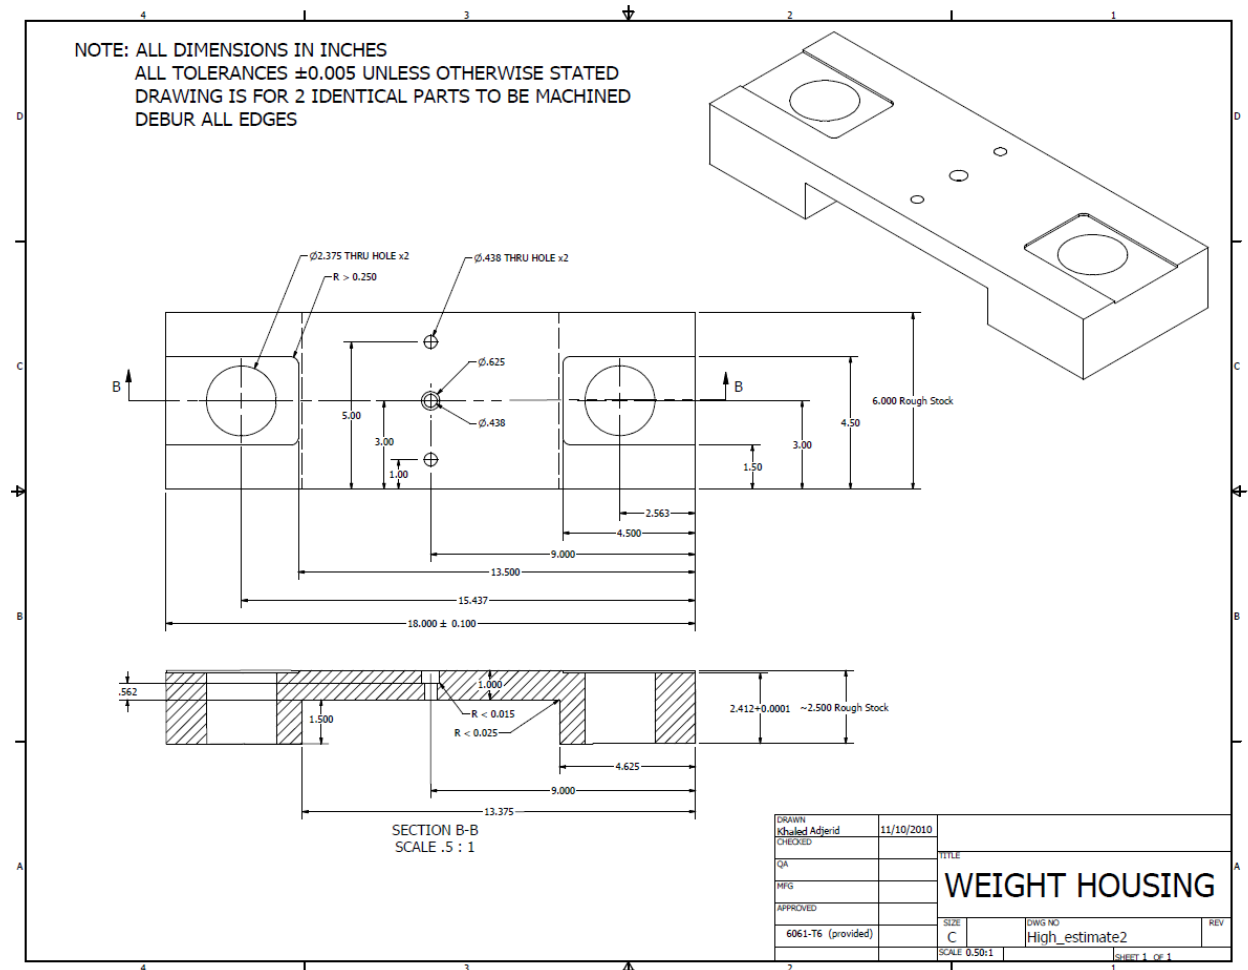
Engineering CAD sketch for upper and lower weight braces.
